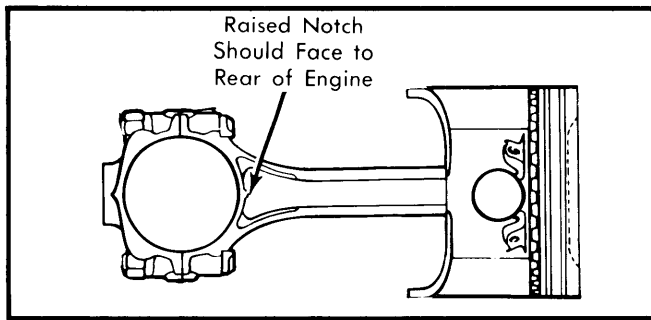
Making Sure Connecting Rod and Piston Assembly are Properly Indexed
